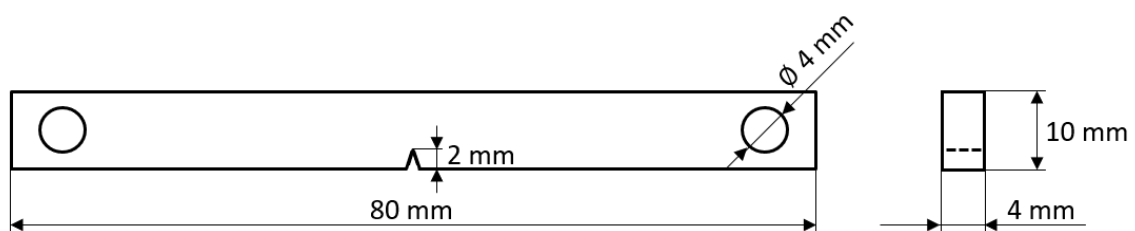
Charpy test specimen dimensions with additional drill holes for mounting in Hoop-Stress Device.
